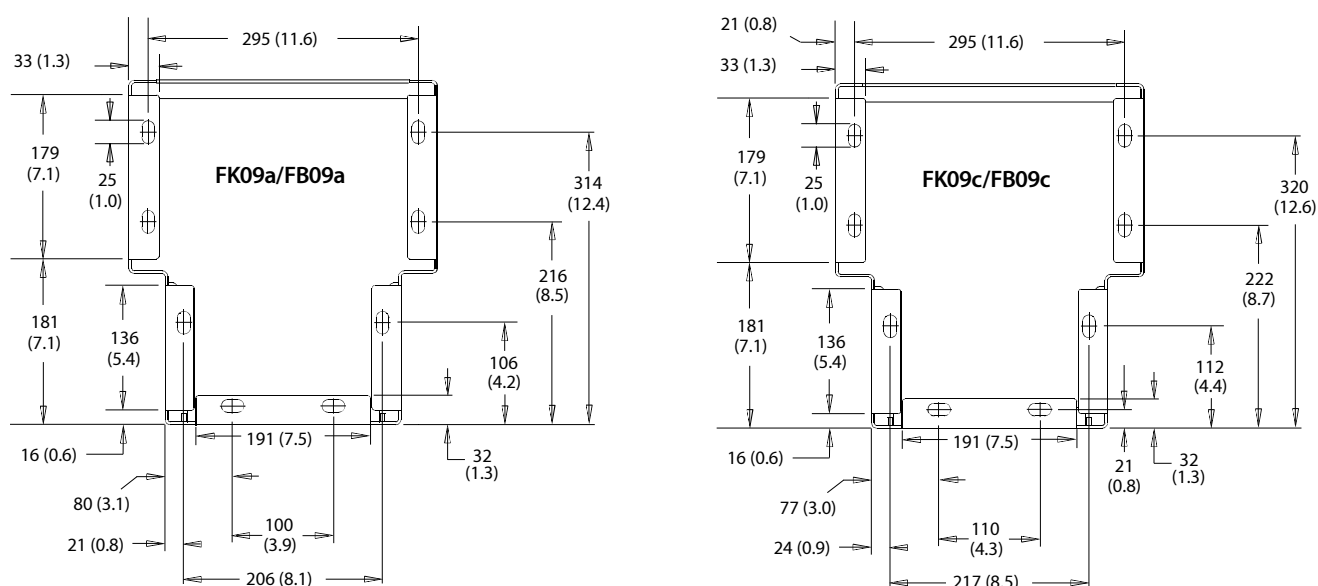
Dimensions for Pedestal Mounting Holes (FK09/FB09 Frames)
